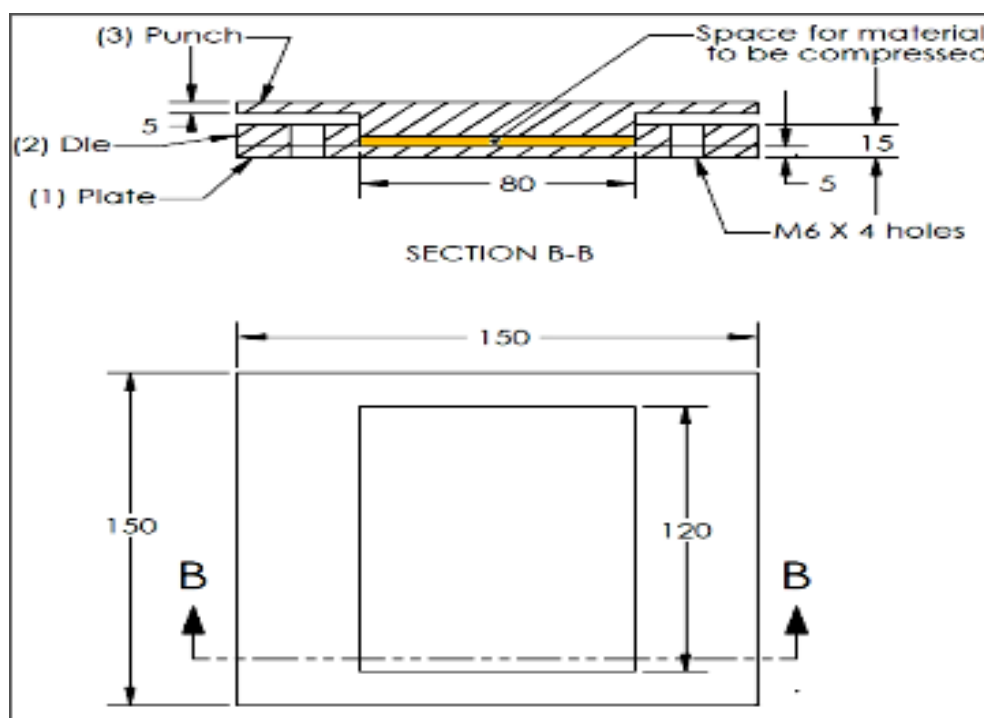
6: assembly drawing of the metallic positive-type mold.
